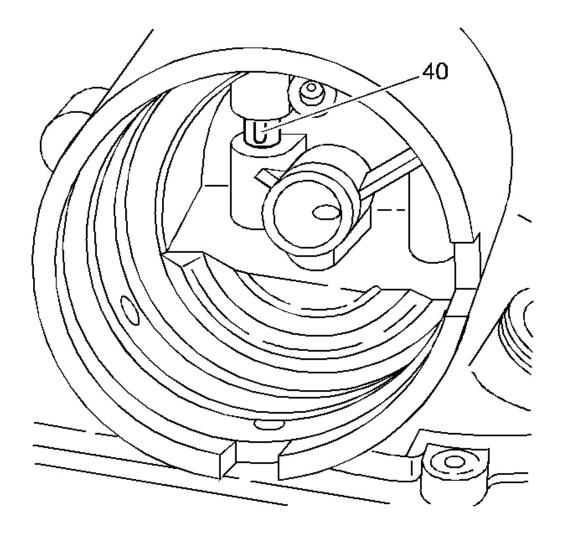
Aligning Third Accumulator Retainer & Ball Assembly With Retainer Slot Courtesy of GENERAL MOTORS CORP.
